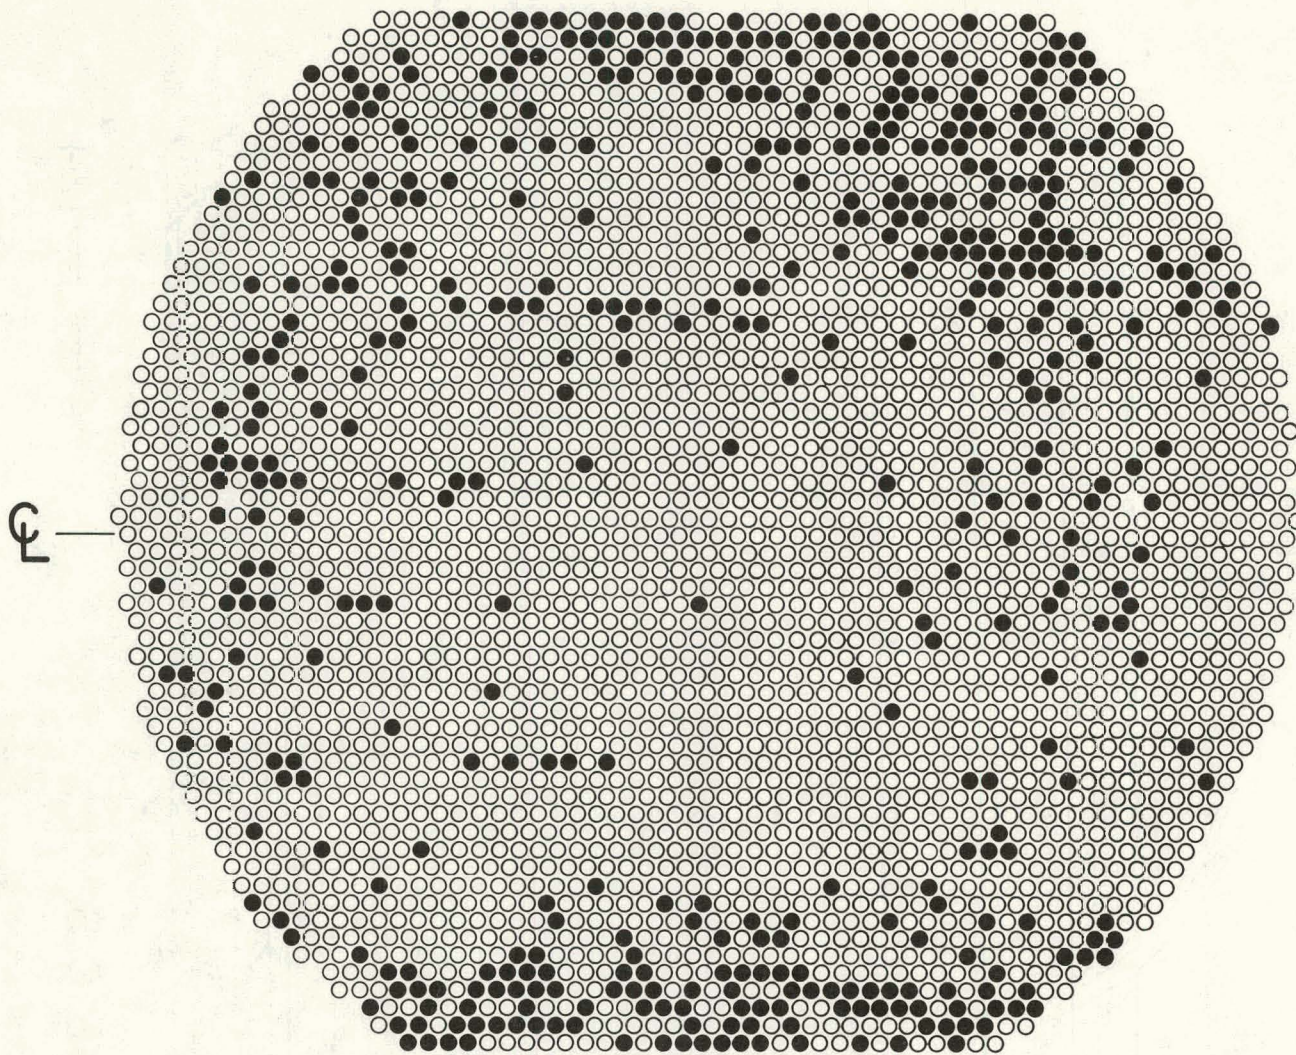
Shippingport 1D Steam Generator Location of all defects at 3rd Support Plate (1969-1970 Inspection)
